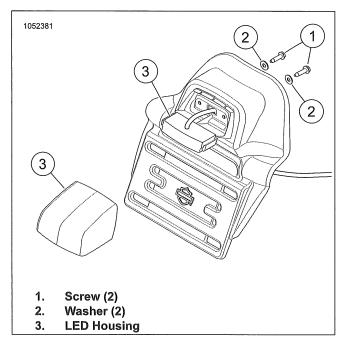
License Plate Mount LED Housing REMOVE AND INSTALL: SIDE MOUNT
